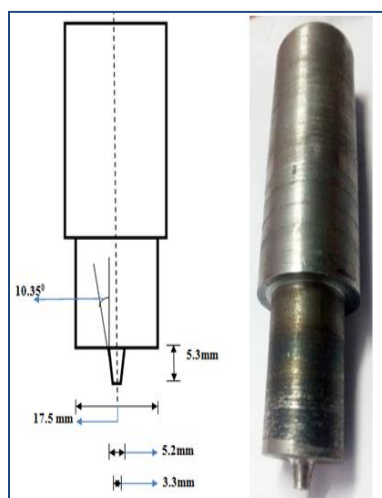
FSW tool as prepared (right) to the required dimension (left)
